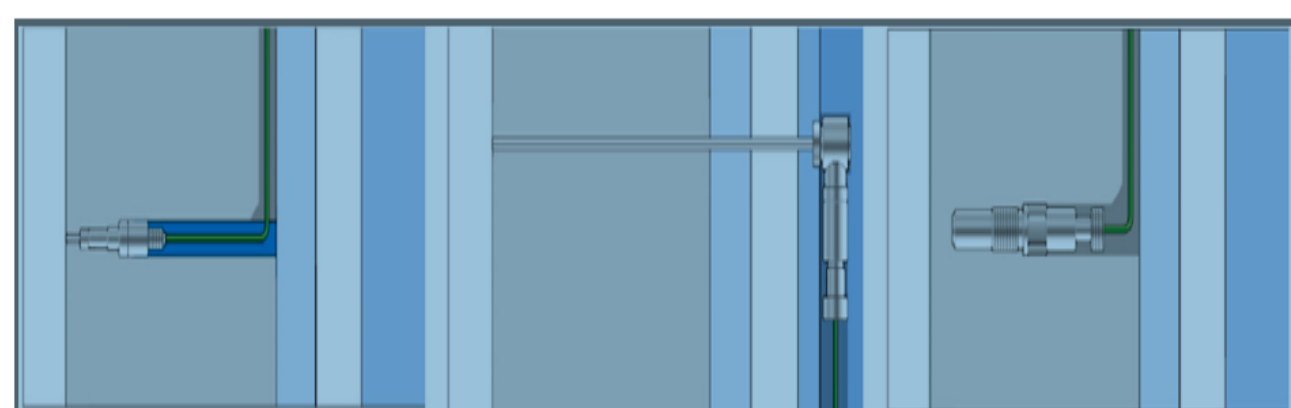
Direct, indirect and contact-free in-mold measurements[5]
